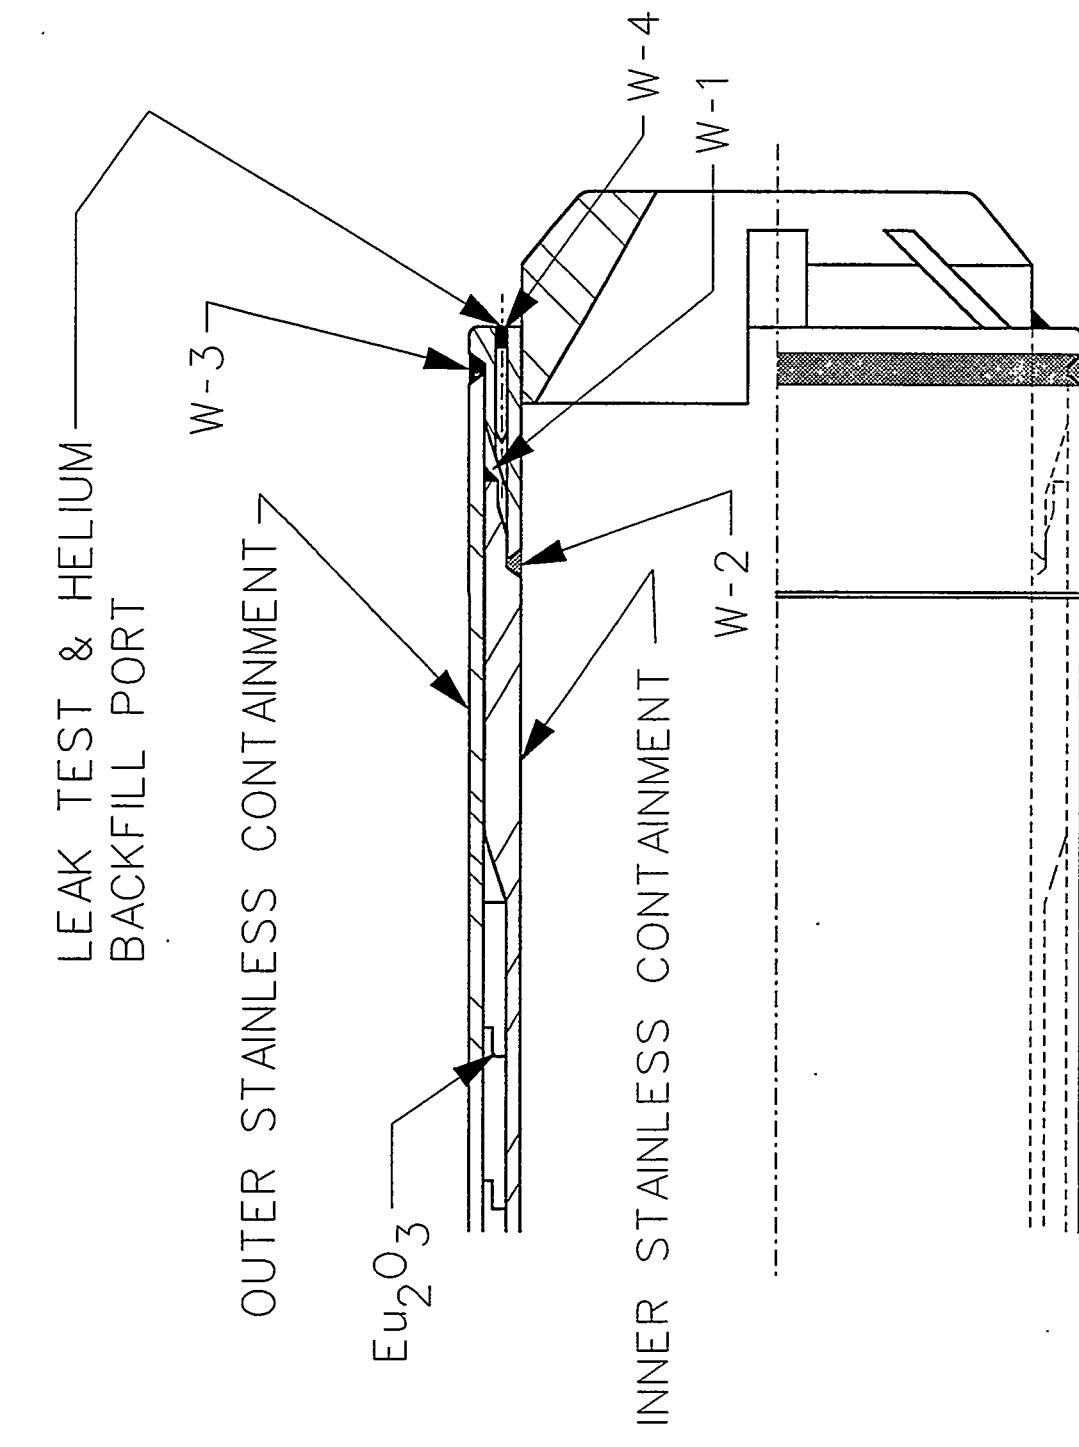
Bottom section of the shield can showing the details of the seal welds. Weld W-1 and one of W-2, W-3, or W-4 must fail in order to produce a leak. W-4 is the seal for the helium back-fill port to provide a means of leak checking the welds.
